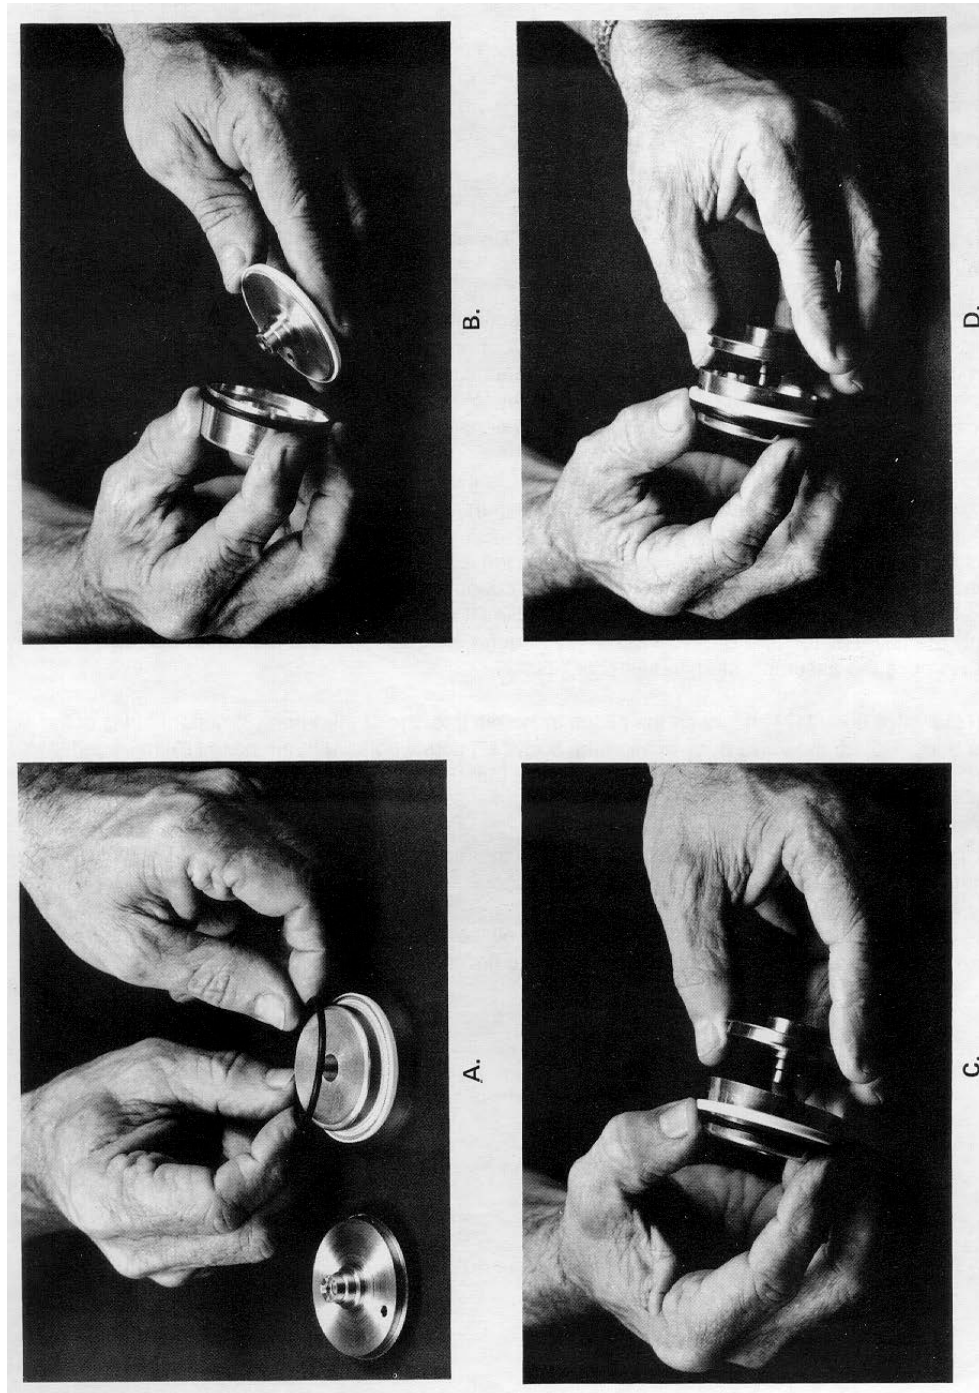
Assembling Bal-Seal (13) on Piston (15)
